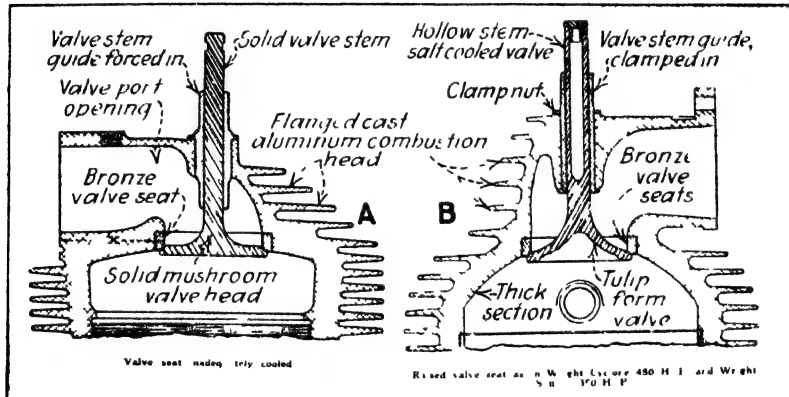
A.—Air-Cooled Cylinder Combustion Head Forms. A—Valve Seat Inadequately Cooled. B—Raised Valve Seat a Superior Form. Note Hollow Stem Valve for Salt-Cooling.
